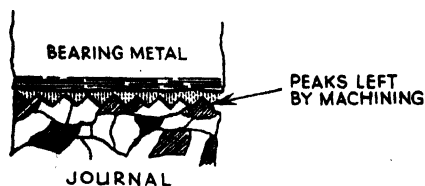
(a).—A section of big end illustrating the metal-to-metal contact under load due to the oil film being ruptured.
